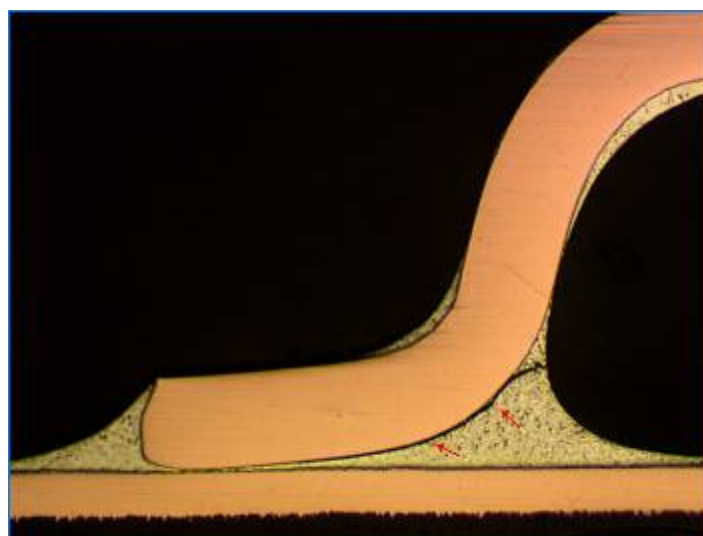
cross section, SN68, U31, left lead solder partial crack, 100x
